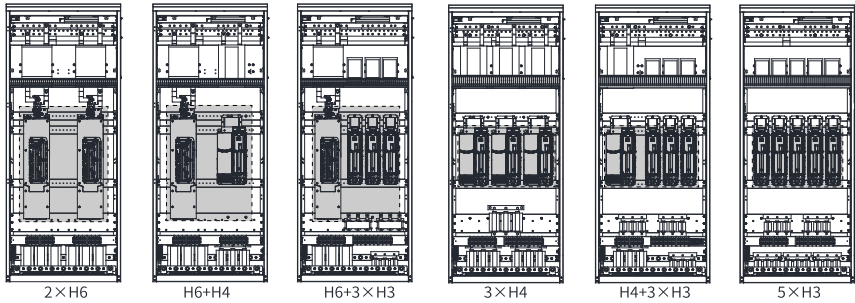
Mounting mode for H1 to H6 drive modules (800-mm wide)
